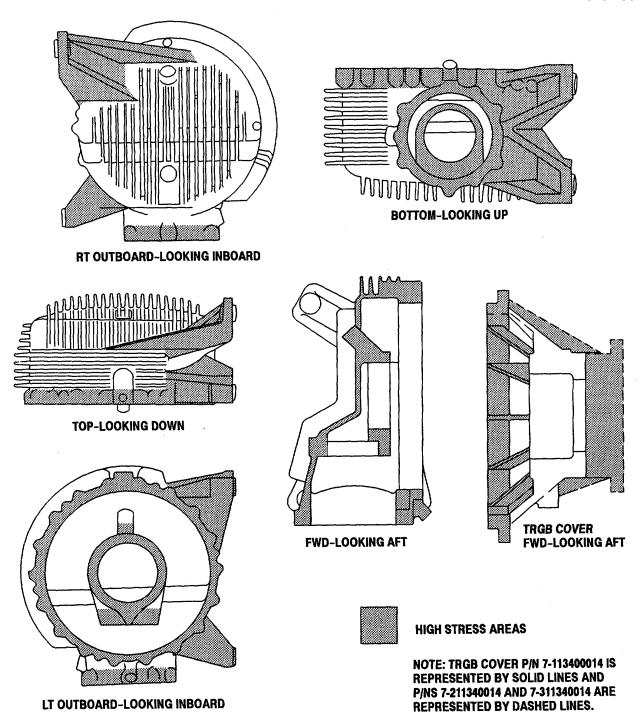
Tail Rotor Gearbox Housing and Cover High Stress Areas
